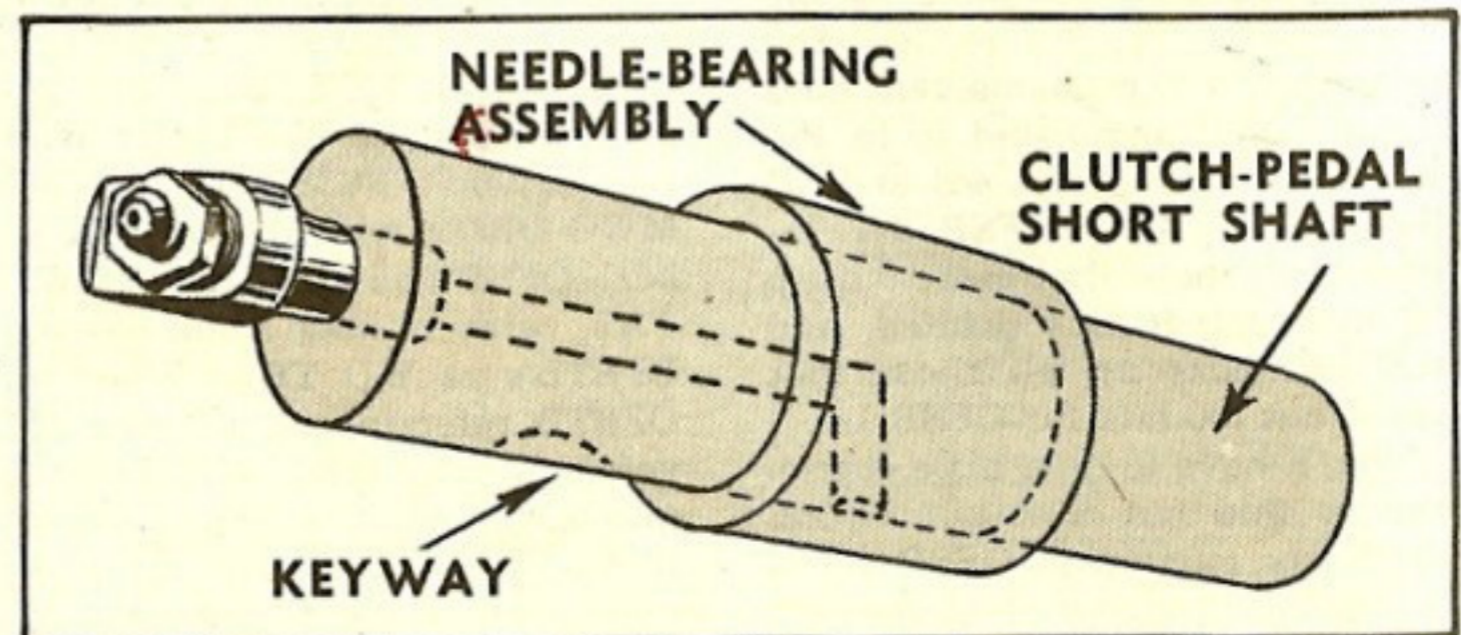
Grease fitting on the 7½-ton prime-mover clutch pedal.
